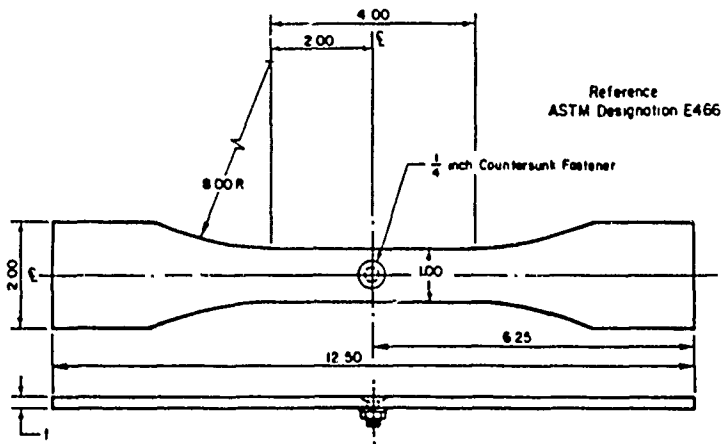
Notched Fatigue Specimen With Countersunk Cap Screw
